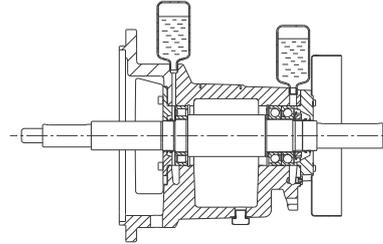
Bearing bracket with a cylindrical roller bearing and two angular-contact bearings lubricated by automatic grease lubricators (grease cartridges)
